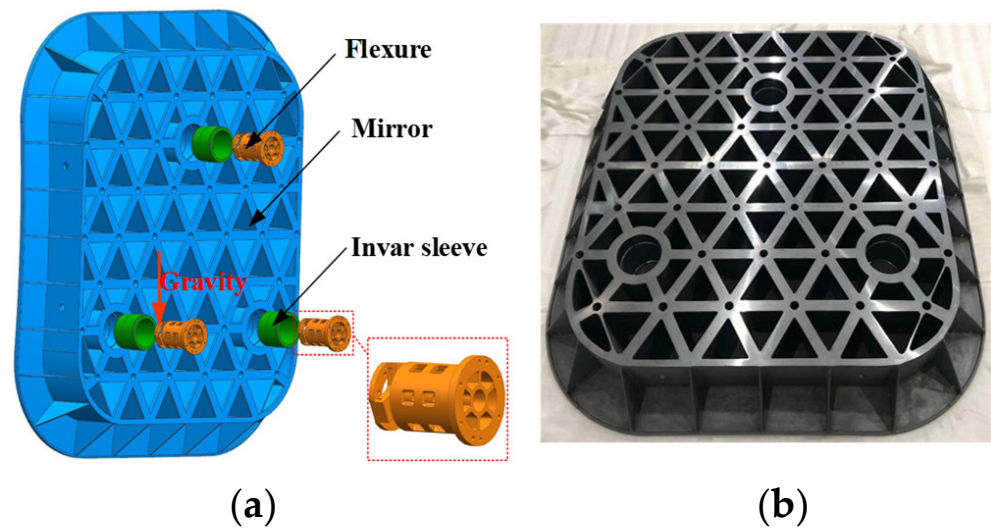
(a) Exploded view of predesigned lightweight mirror assembly showing the symmetries, invar sleeve, gravity orientation, and illustration of the adopted flexure configuration. (b) The square SiC mirror under milling.
